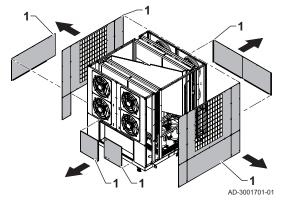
Removing cover heating side of the E-HP AW 44 / 88
